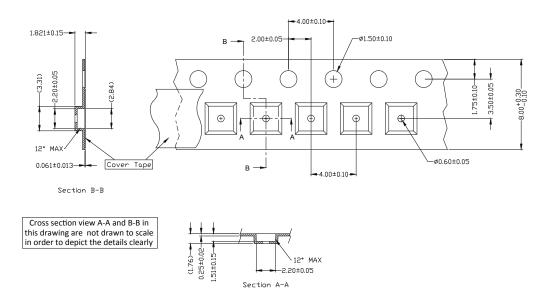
Pocket Tape dimensions for LUXEON C Color Line.
